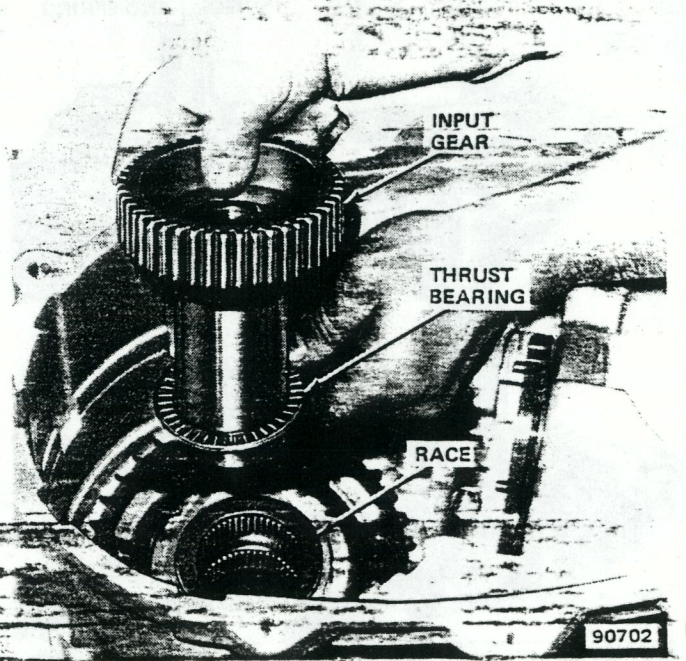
D-62 Input Gear and Thrust Bearing Removal/Installation
